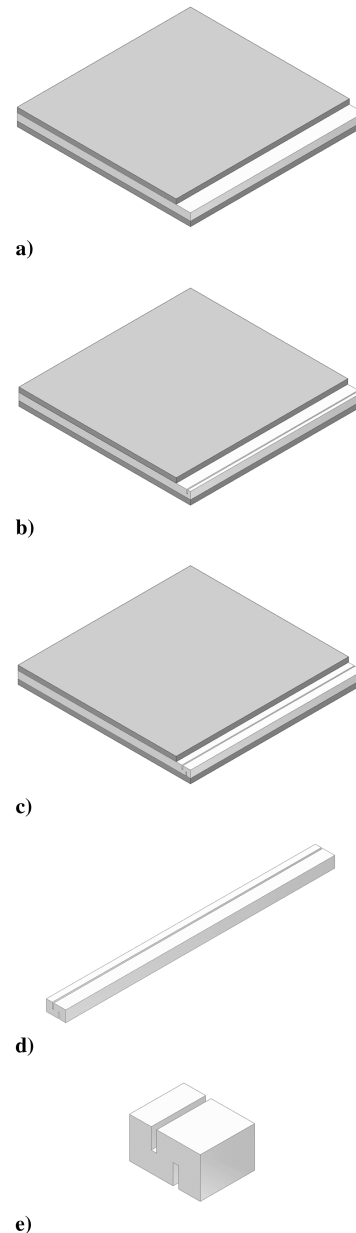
Specimen machining procedure: a) insulation panel between aluminum plates; b) first notch machined into insulation; c) insulation inverted, second notch machined; d) strip machined from panel; e) specimens cut to length from strip.
